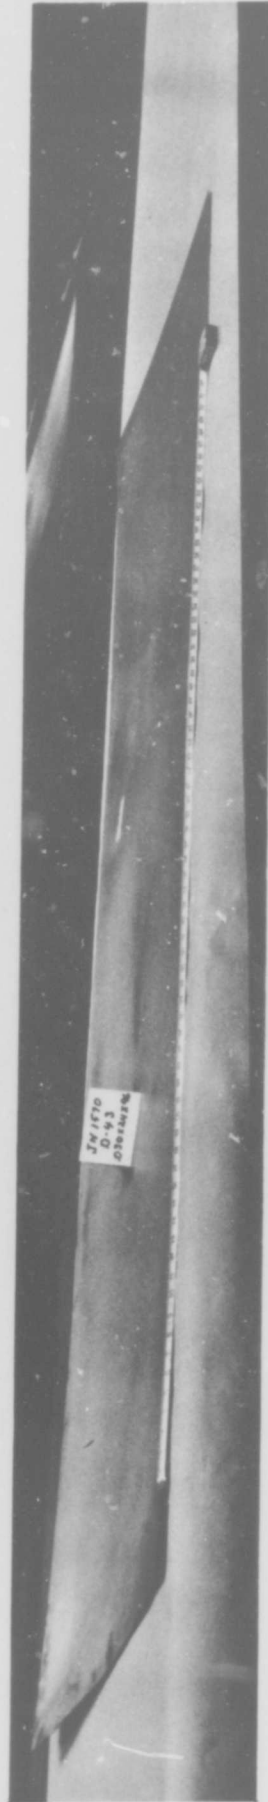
A. D-43 Sheet 0.030" Gage Before Shearing
